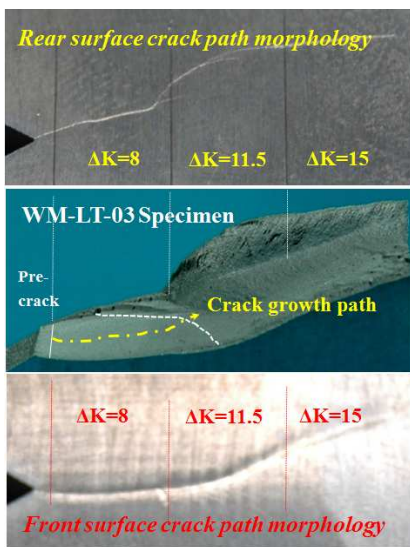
Fracture surface of WM-LT-03 specimen
